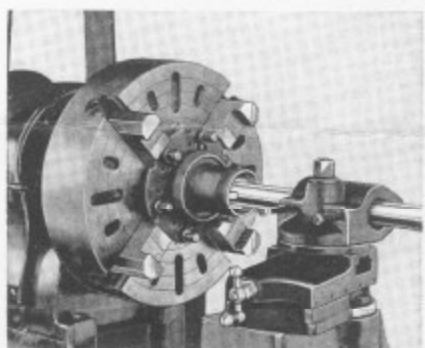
Boring out a Welded Wheel Hub to Form New Bearing Cup Seat.
